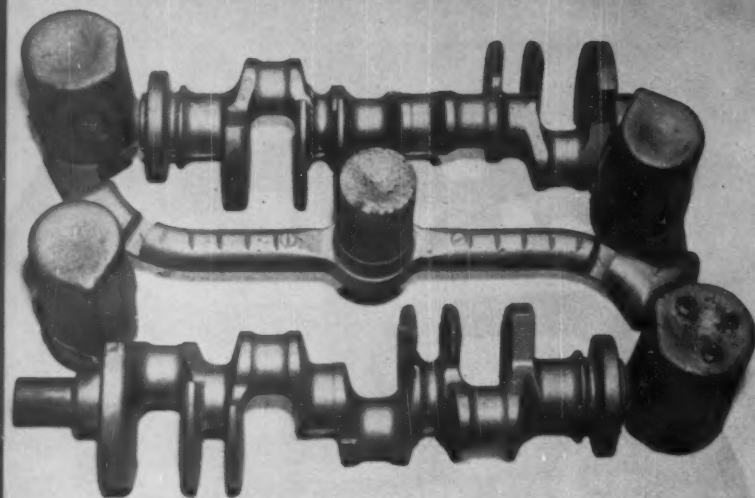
Crankshafts are molded and poured "two-on." Actually, there is more metal in the runners, sprue post, and bobs than in the two crankshafts.
